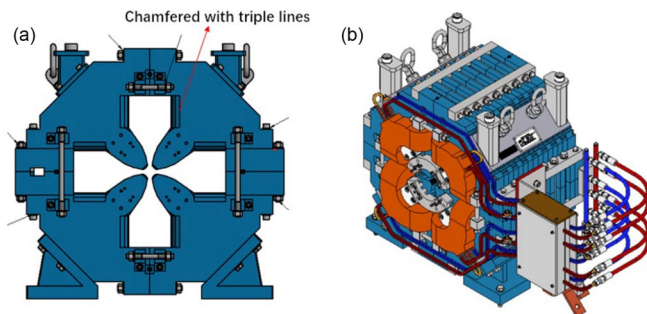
QD7 iron core model drawing without connecting plates (a) and QD36 assembly drawing (b).
